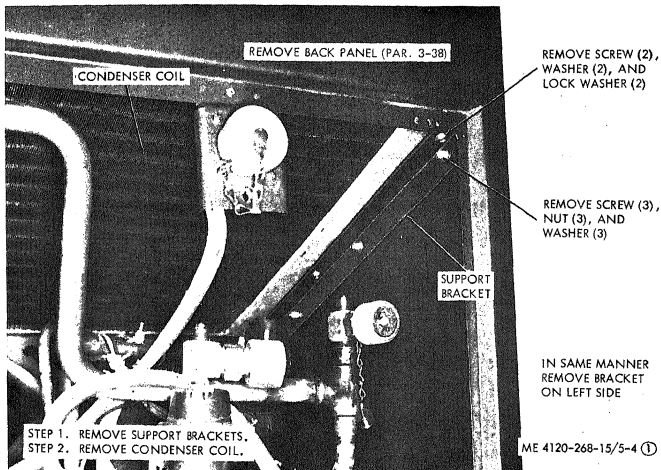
Condenser Coil, removal and installation (Sheet 1 of 2).
